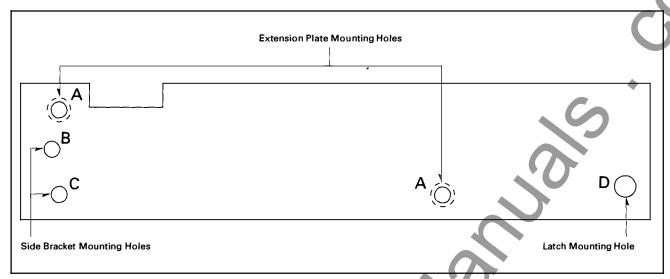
Side Bracket and Latch Mounting Locations on Extension Plate for 400A-2000A Breakers
